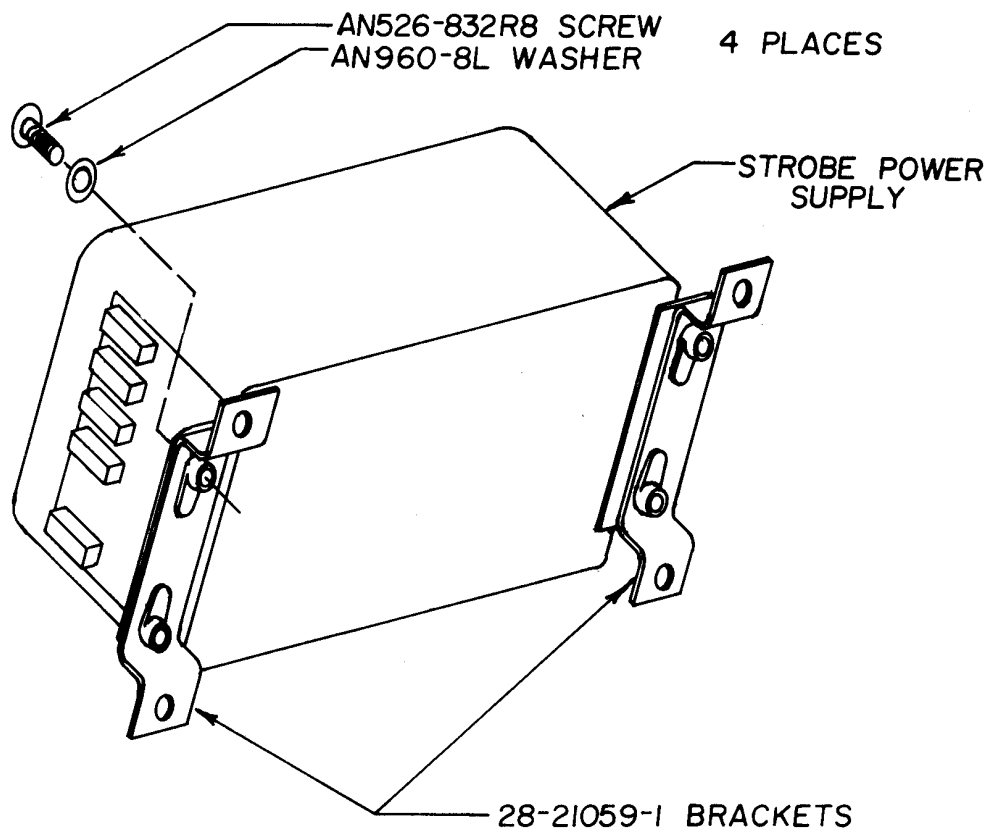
Attaching the Strobe Power Supply to the Brackets
